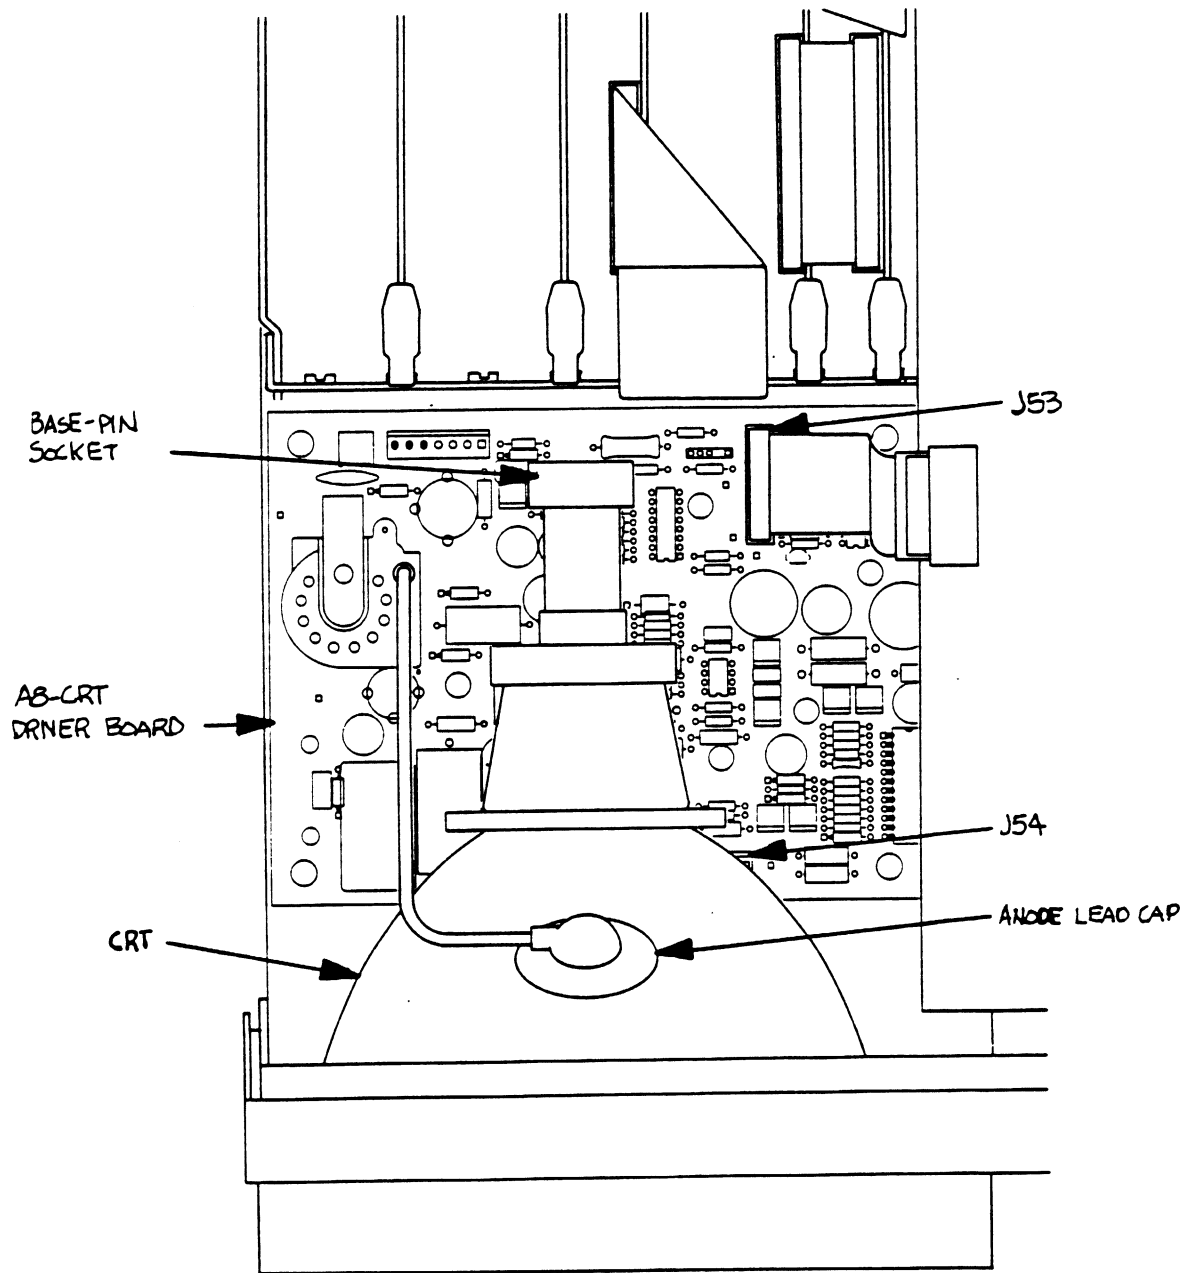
Top view of CRT and AB-CRT Driver Board.
